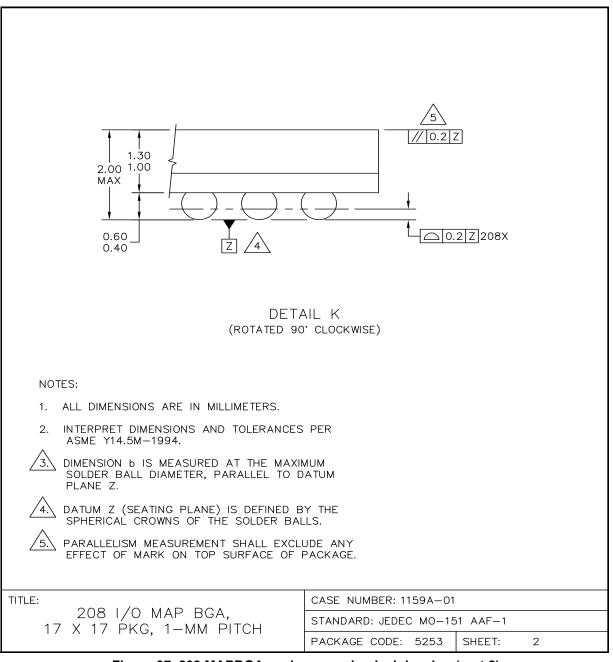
208 MAPBGA package mechanical drawing (part 2)
